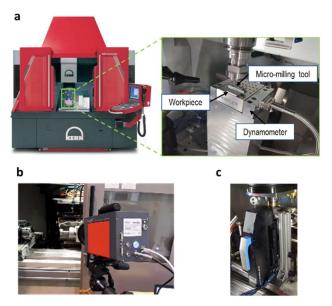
Exemplary integrated measuring devices into machine tools. a) dynamometer, b) thermographic camera, c) confocal microscope
